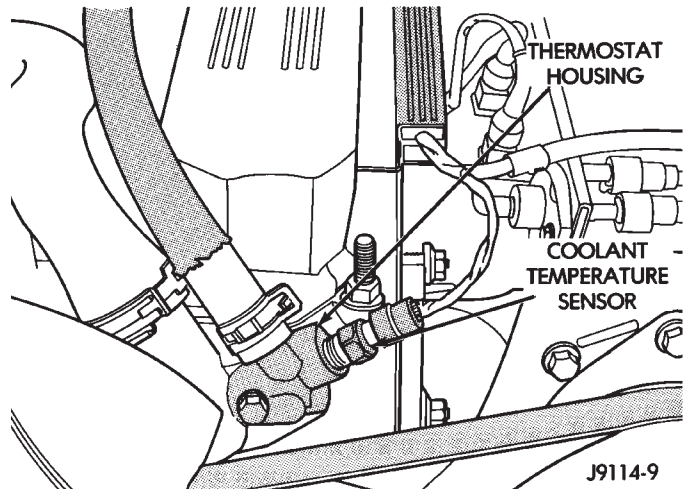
Engine Coolant Temperature Sensor—Typical REMOVAL
